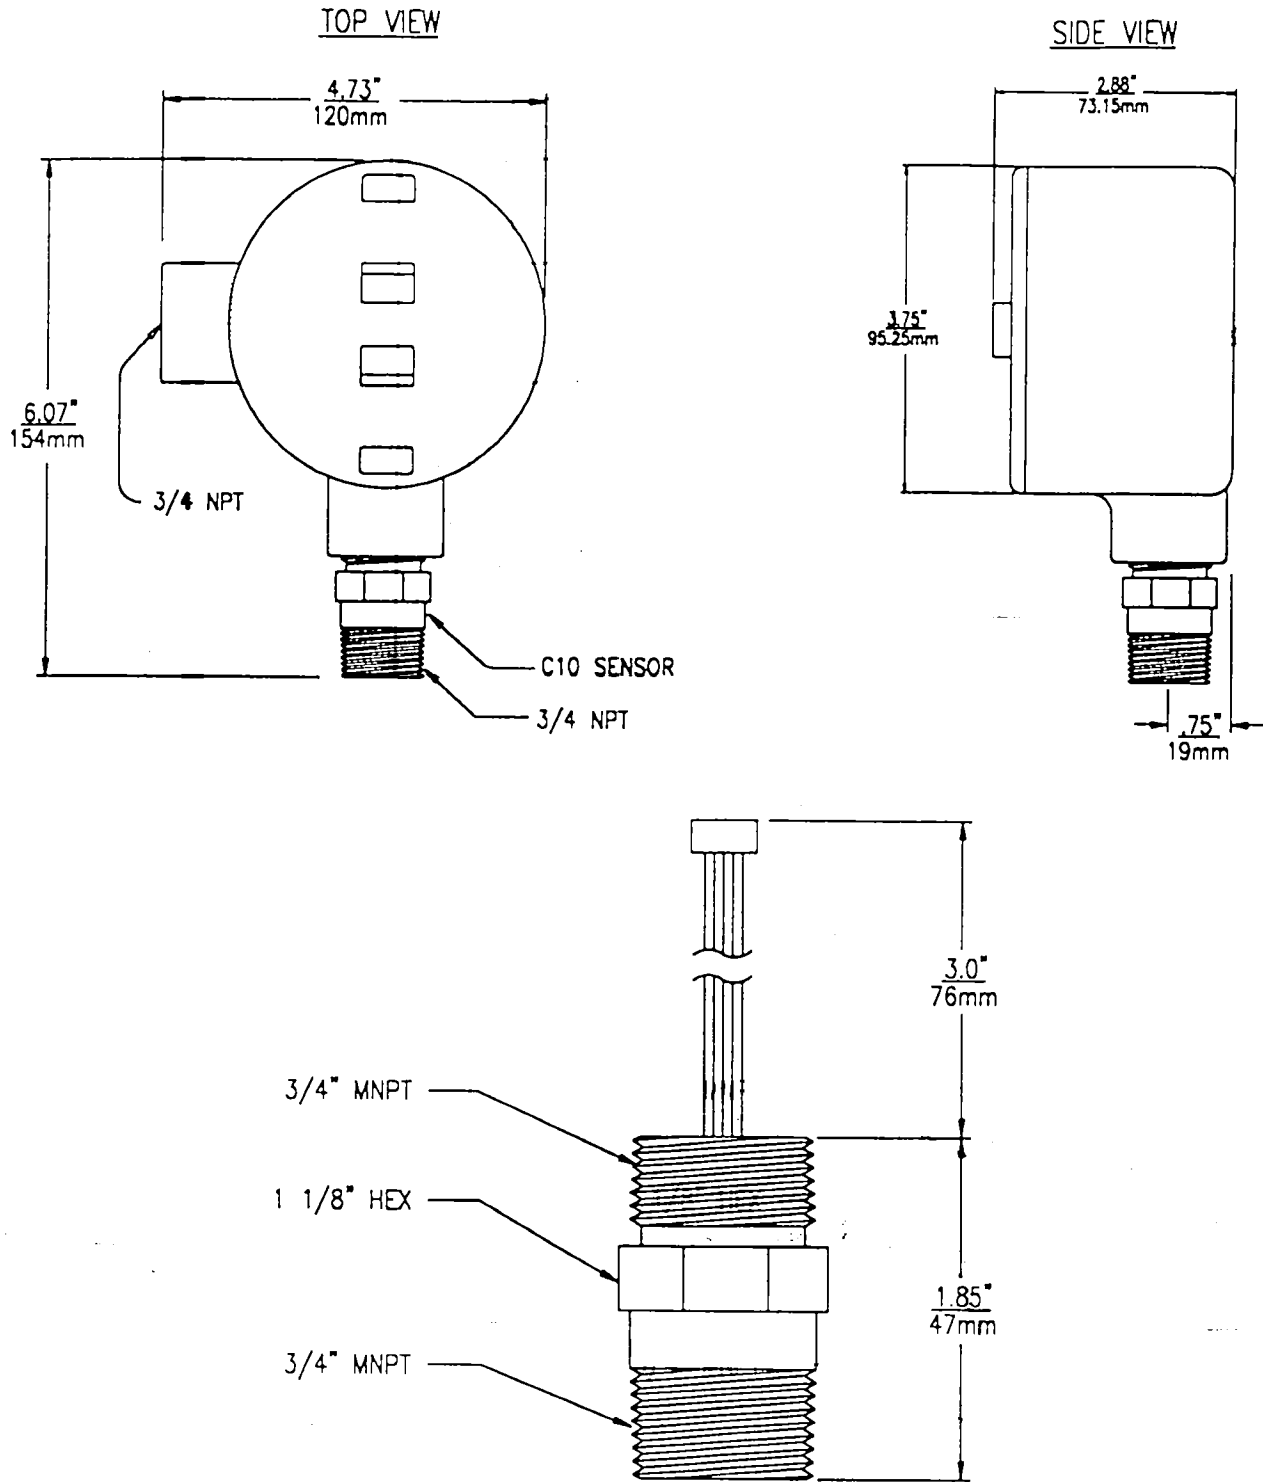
Explosion-Proof Sensor/Transmitter Dimensions (ATI-046, ATI-0170)
